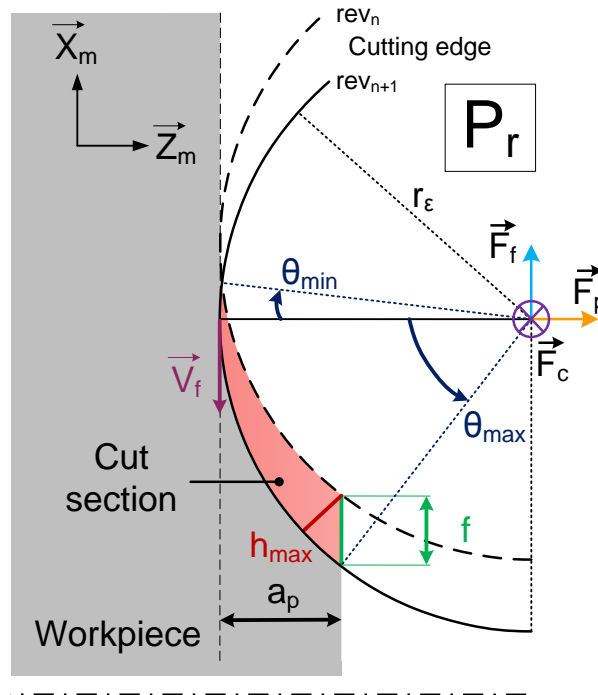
Cutting edge engagement during face turning with a round cutting tool.
